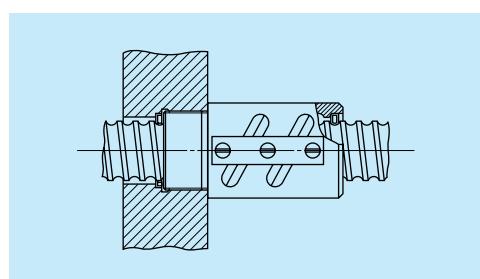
Installation of brush-seal to a ball nut with thread screw
